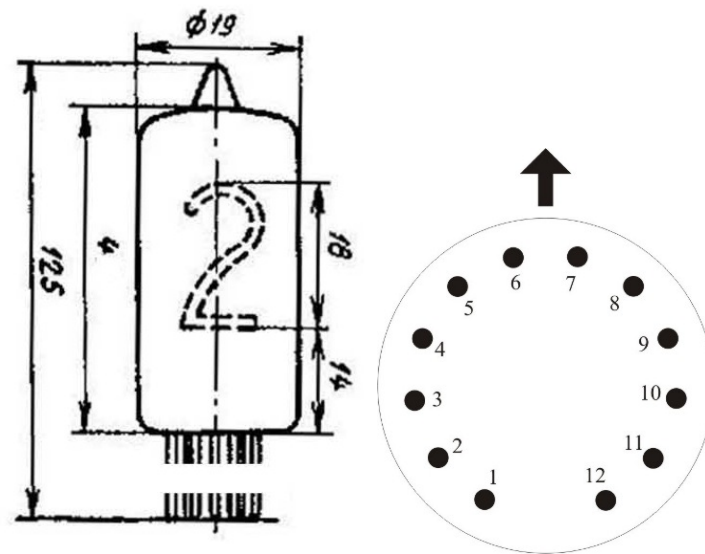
IN-8-2 Nixie tube dimensions and pinout<sup>6</sup>
